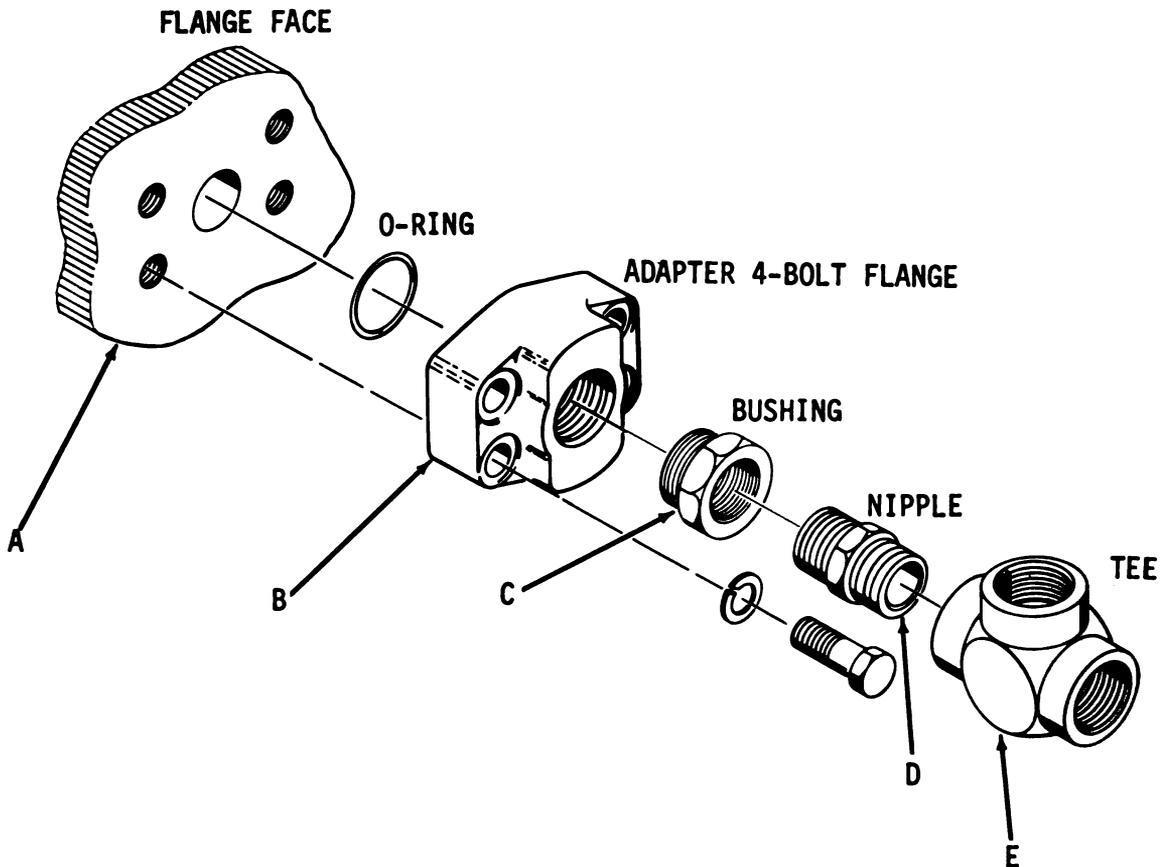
Connecting a 4-Bolt Split Flange Face to a TEE.
